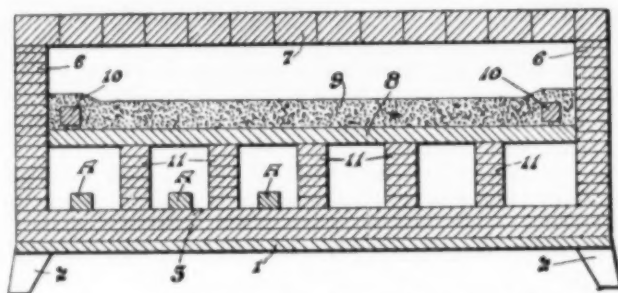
LONGITUDINAL SECTION OF FURNACE
